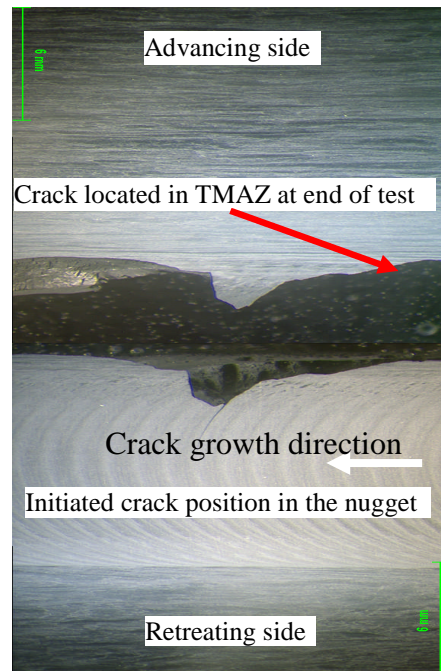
Crack location in TMAZ prior to final failure in 125 mm x120 mm CT sample
